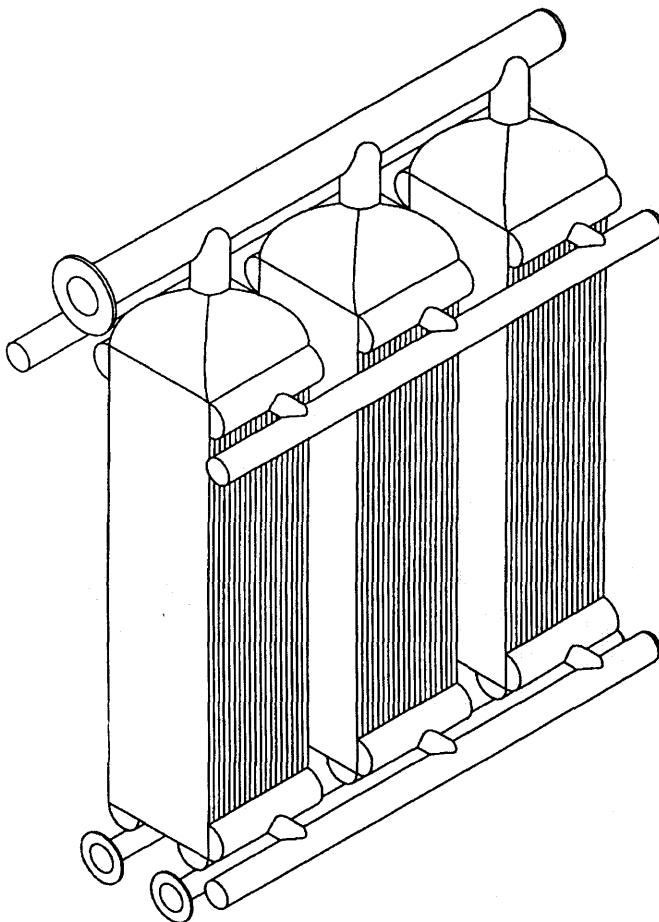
Typical Assembly of Three Brazed Aluminium Plate-Fin Heat Exchangers in Parallel
